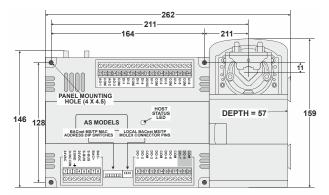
Duct mounting, dimensions in mm (AS-models)
